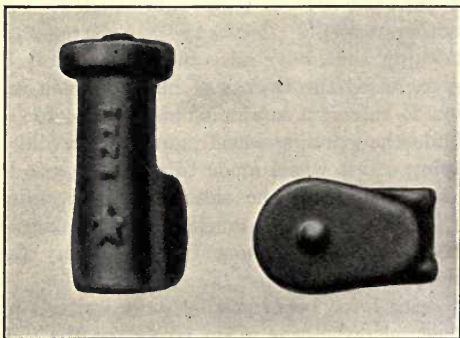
Ideal shape of castings for testing economy of wheels.
